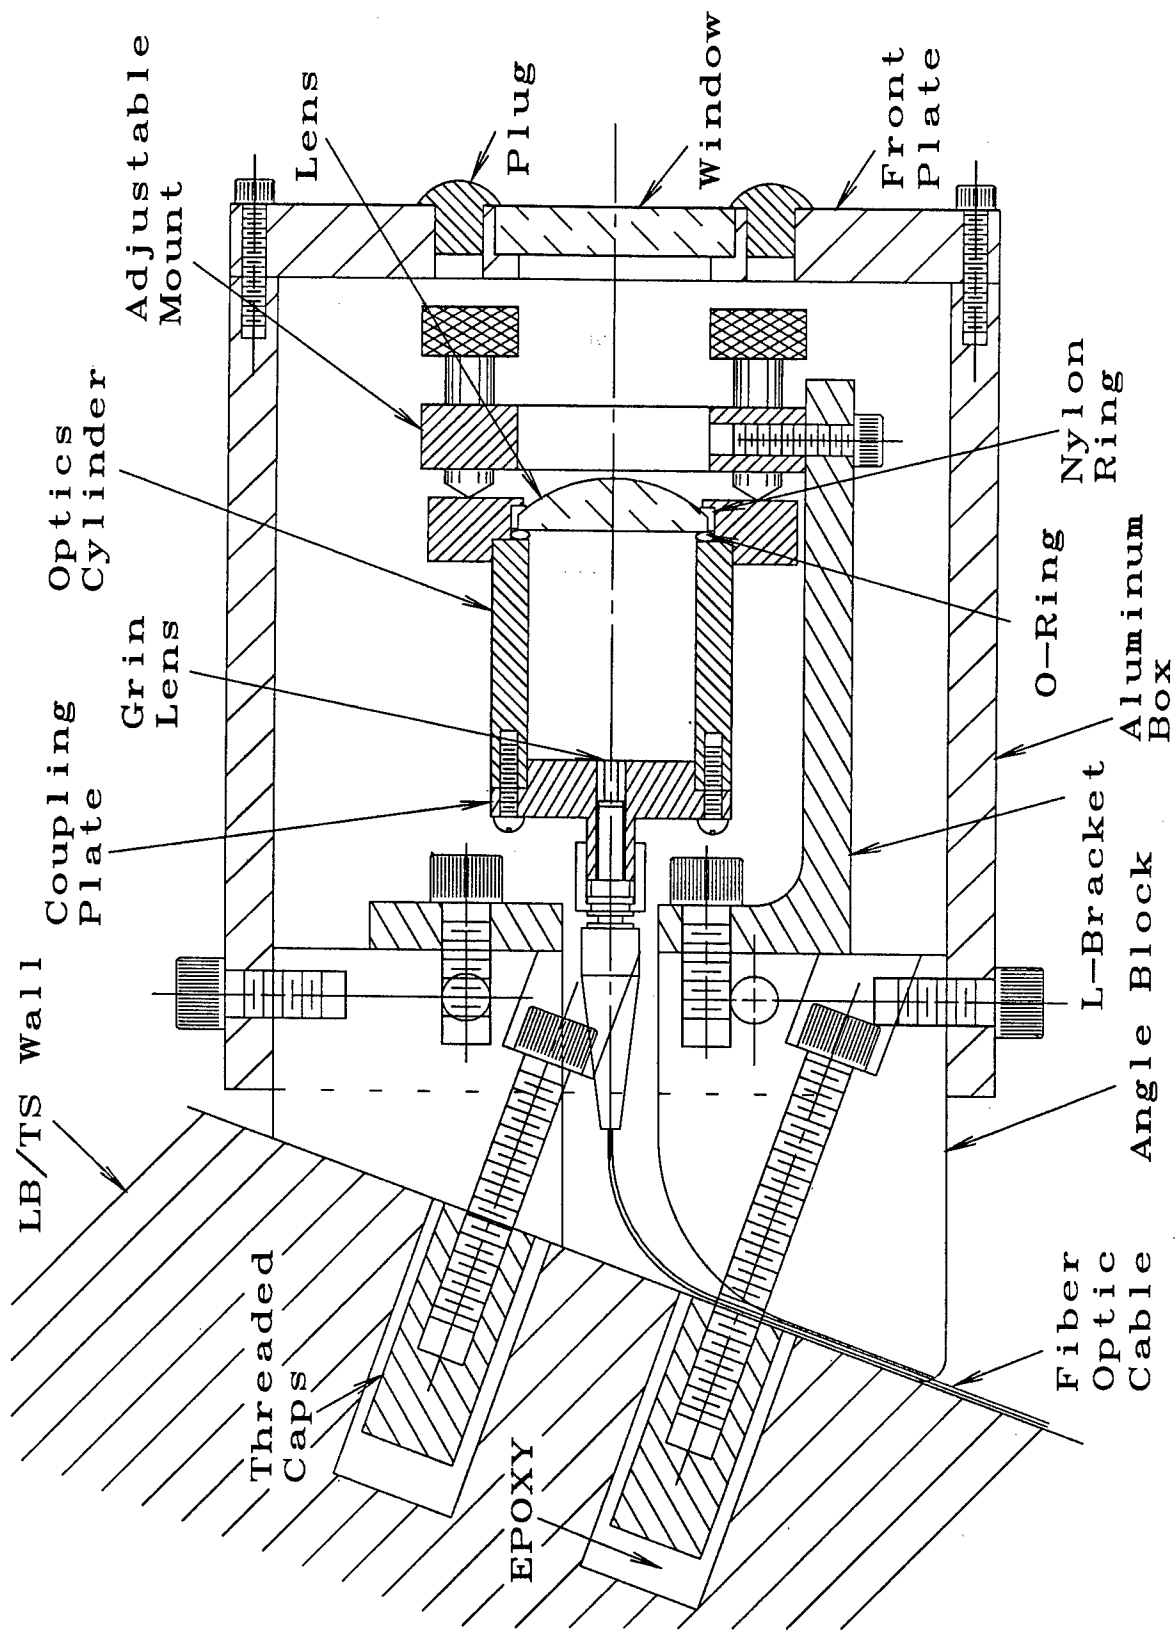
Assembly drawing of optics mounting/adjusting apparatus.
